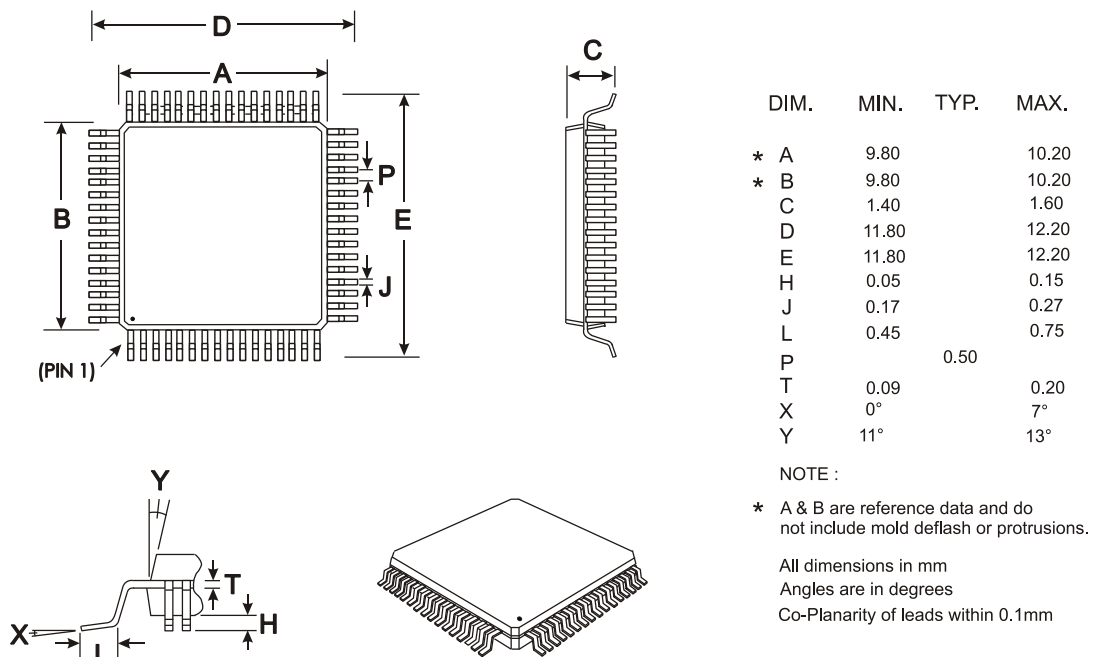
Mechanical Outline for 64-pin LQFP (leaded) Package (L9)
